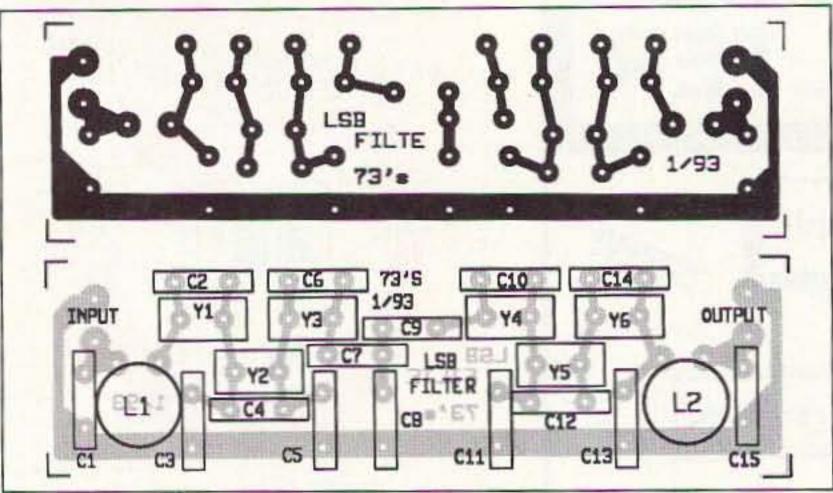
(a). PC board foil pattern for the lower sideband filter. (b). Parts placement diagram.
